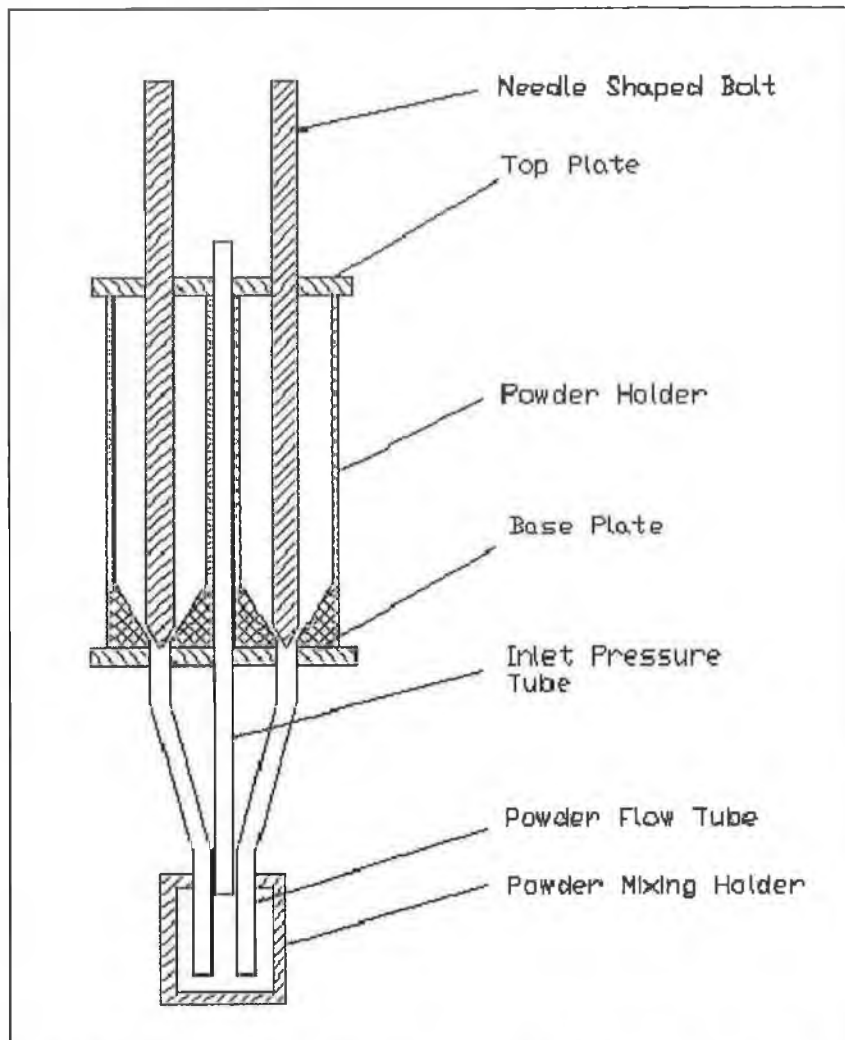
Sectional assembly drawing of the proposed designed parts.
